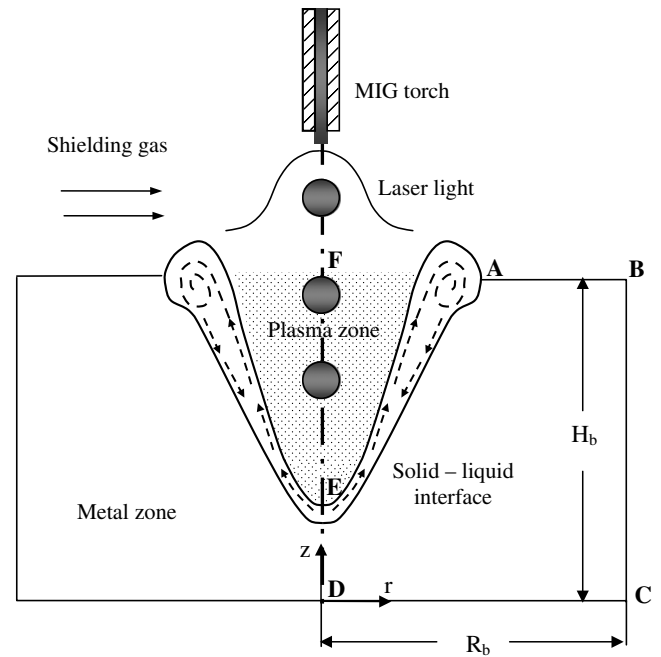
Schematic sketch of a spot hybrid laser-MIG welding process.
